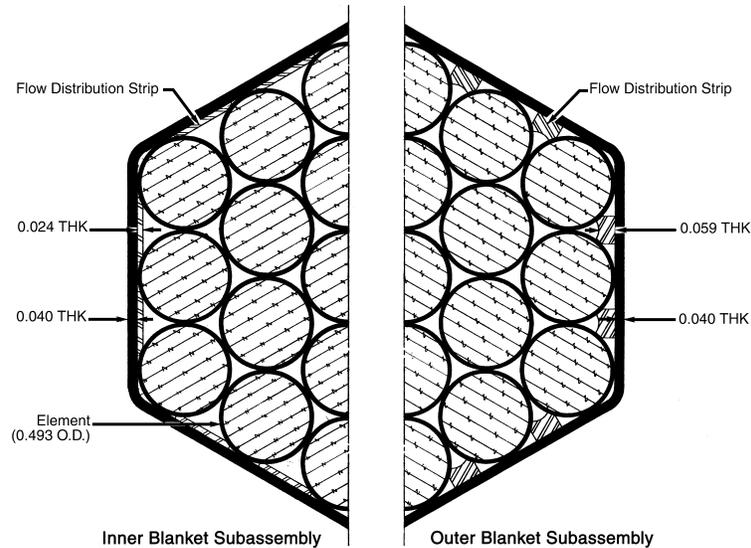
INNER BLANKET AND OUTER BLANKET SUBASSEMBLIES CROSS SECTIONS.
